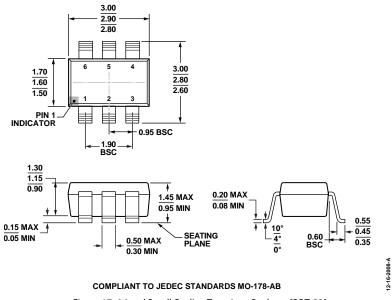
6-Lead Small Outline Transistor Package [SOT-23] Dimensions shown in millimeters
